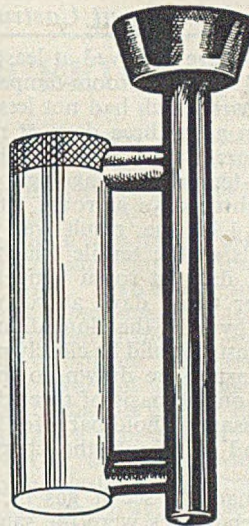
BOTTOM-POUR GATING ARRANGEMENT TO SUPPLY HOT METAL, FINALLY, TO THE TOP OF THE CASTING.
